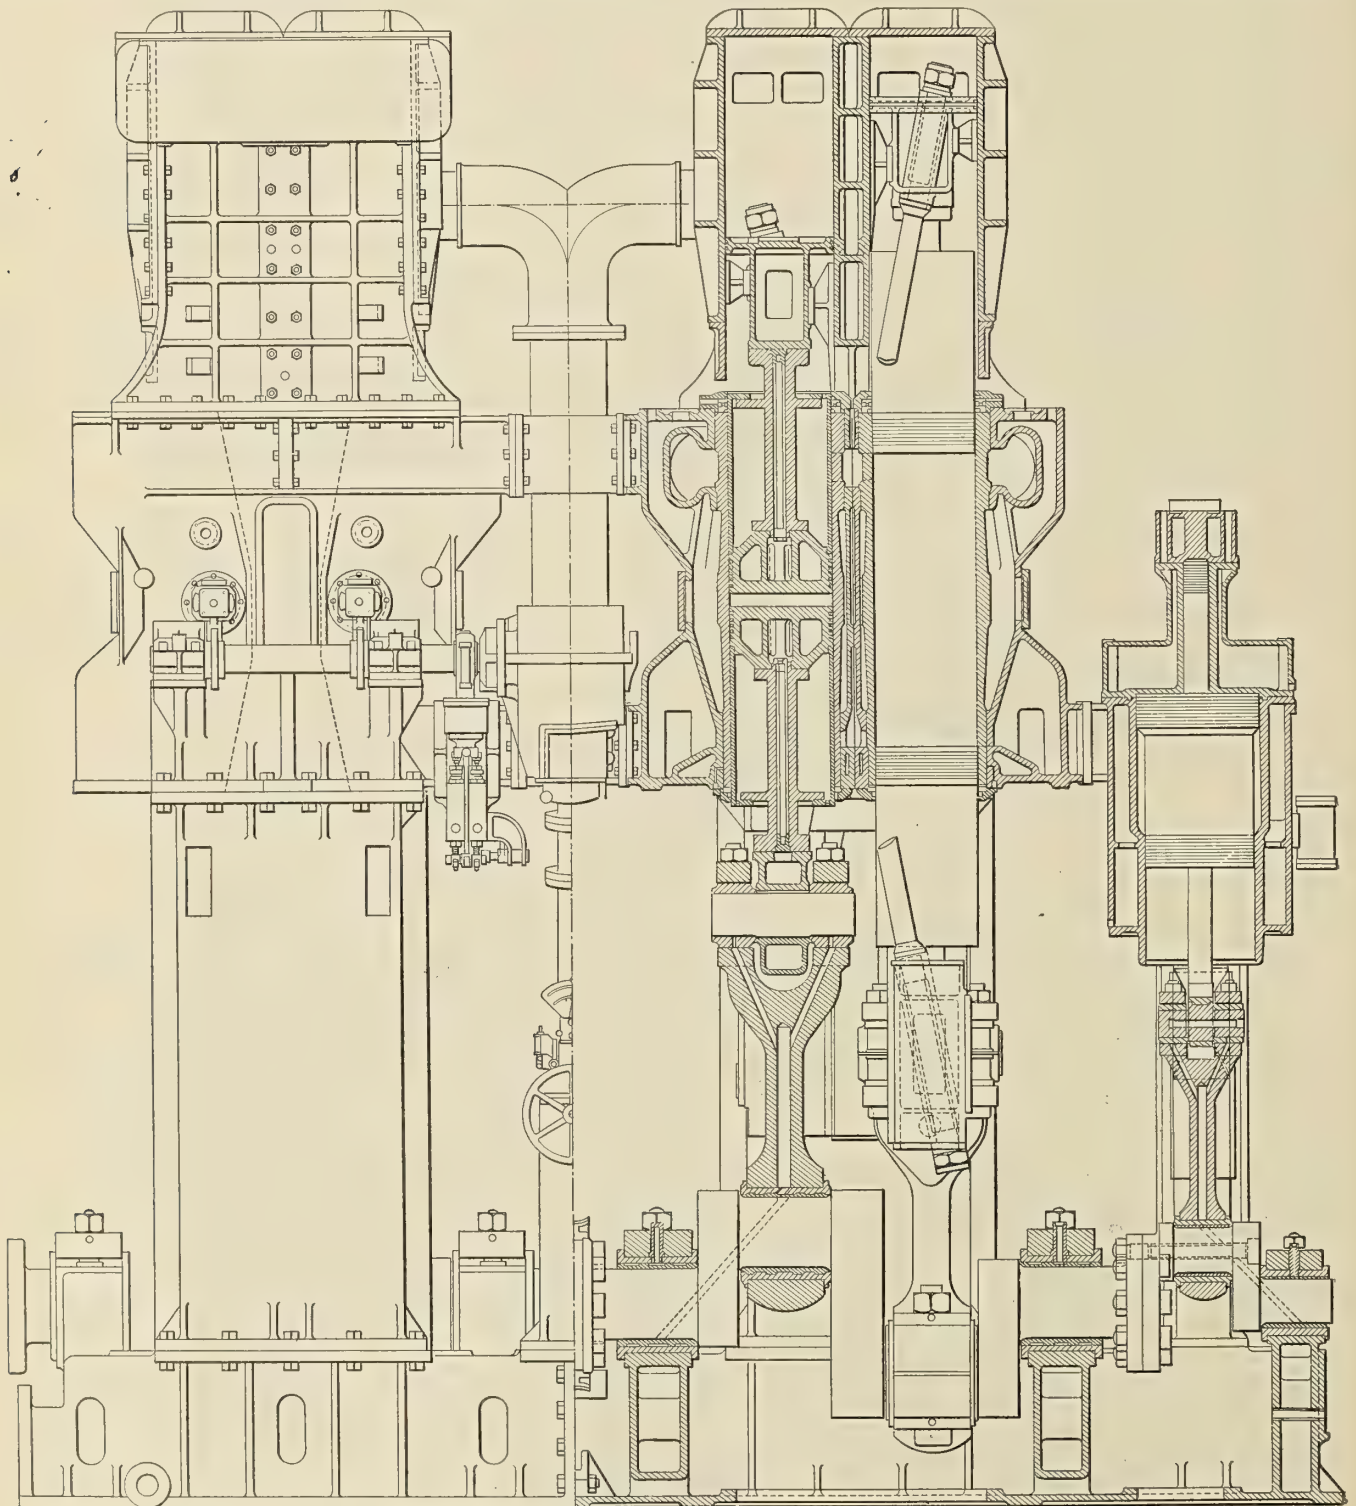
Side Elevation and Partial Section of Cammellaird-Fullagar Engine
